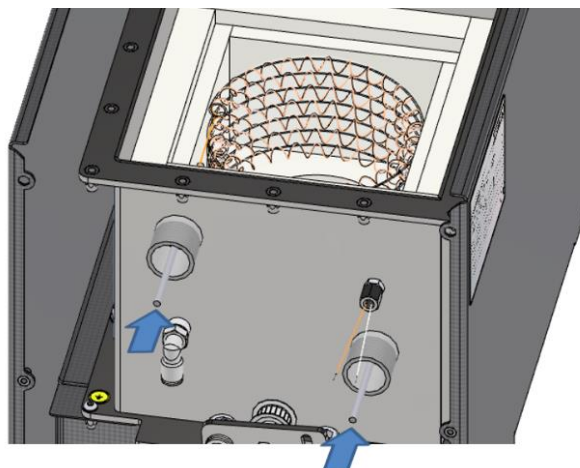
Sliding the connection ends into the furnace (similar to picture)
